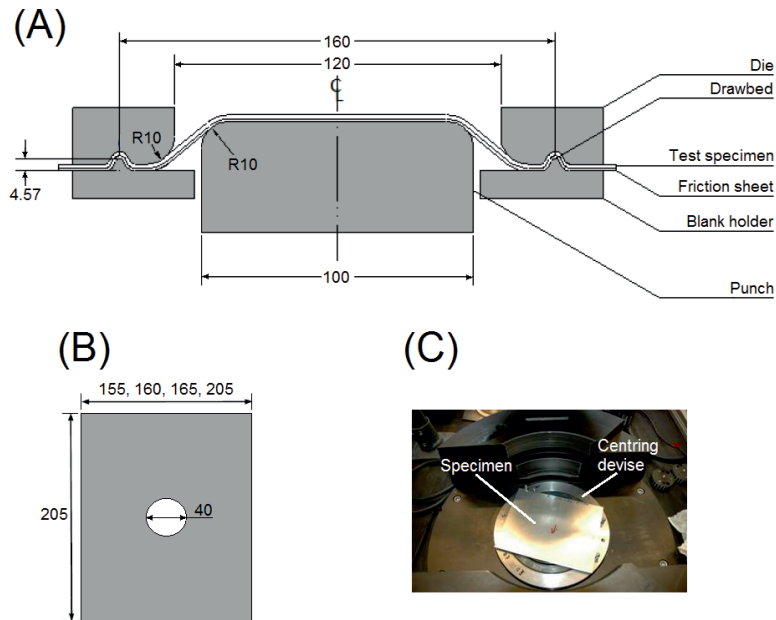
Marciniak-Kuczynski test set up (measurements in mm). (A) Sketch of test set-up, and (B) specimen dimensions (the hole is only for the friction sheet). (C) Centring devise used for the specimens.
